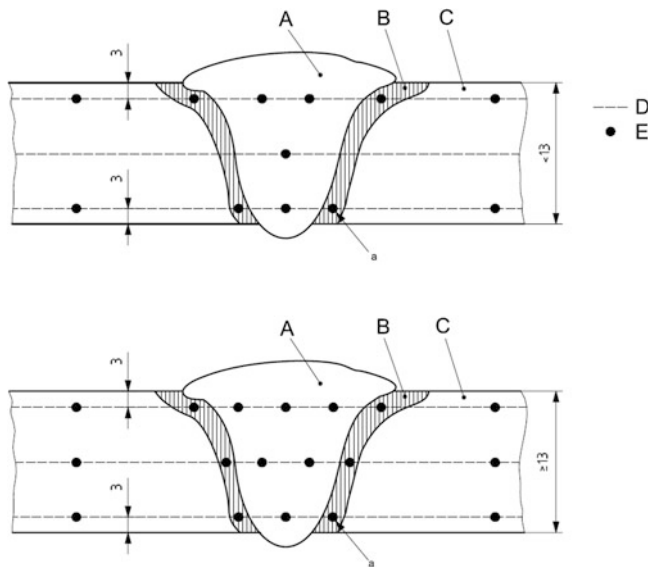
Butt-weld survey method for Rockwell Hardness Measurement (dimensions: mm). (Source: NACE MR0175/ISO15156, Part 2). Key: A weld. B weld HAZ (visible after etching). C parent metal. D lines of survey. E hardness impressions: Impressions in the weld HAZ should be located within 2 mm of the fusion boundary
